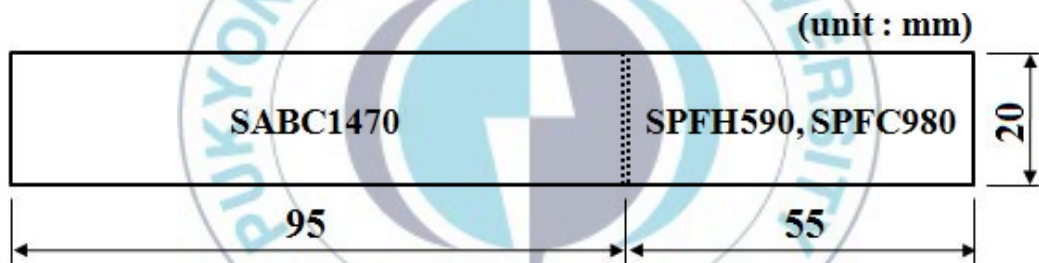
Shape and dimensions of high speed bending specimen of different materials bonded with laser TWB
